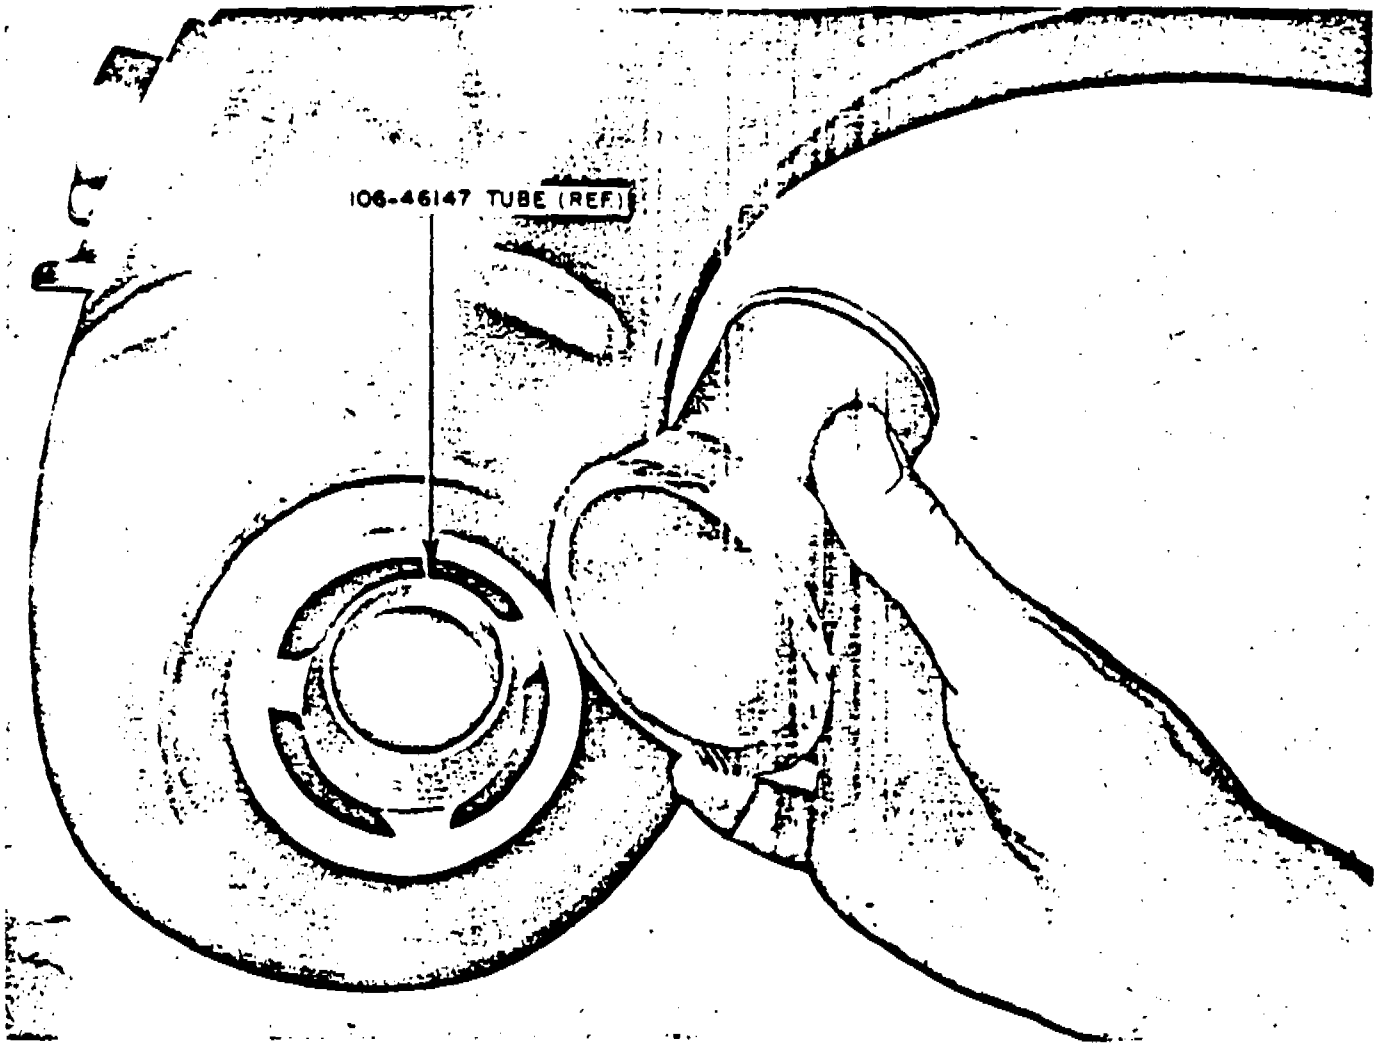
View After Cutting Showing Three Supporting Lugs Before Rework - Left-hand Outlet Shown
